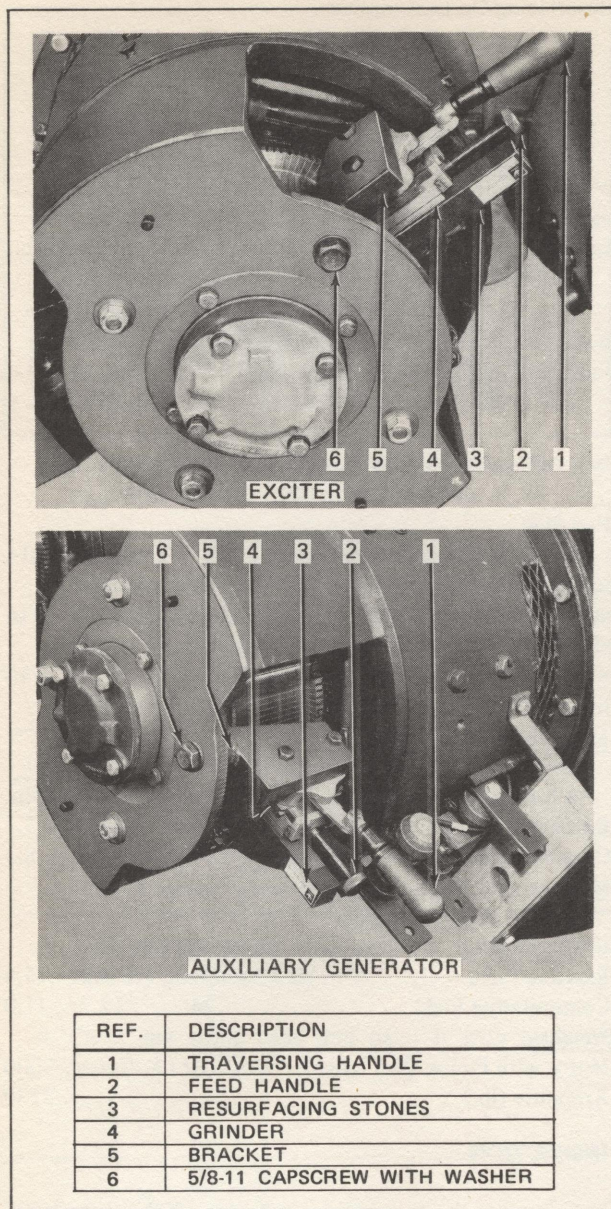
COMMUTATOR GRINDER INSTALLED IN GY27 MACHINES.
